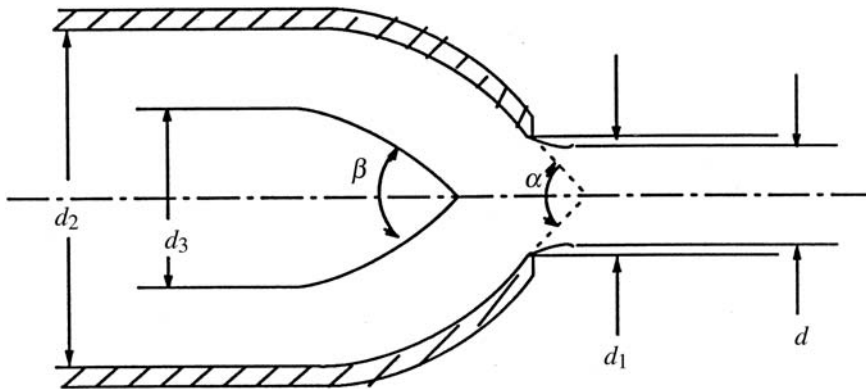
Typical dimensions of a Pelton wheel nozzle.
